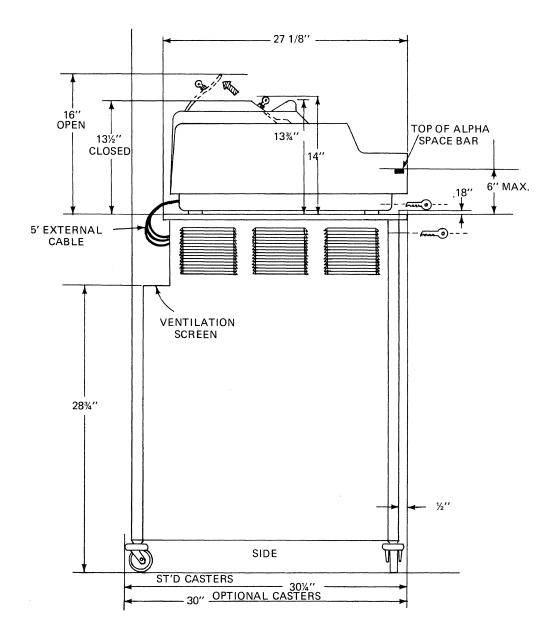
Dimensions, Side View, Series TC 700 and L 3000 Window Accounting Computer
